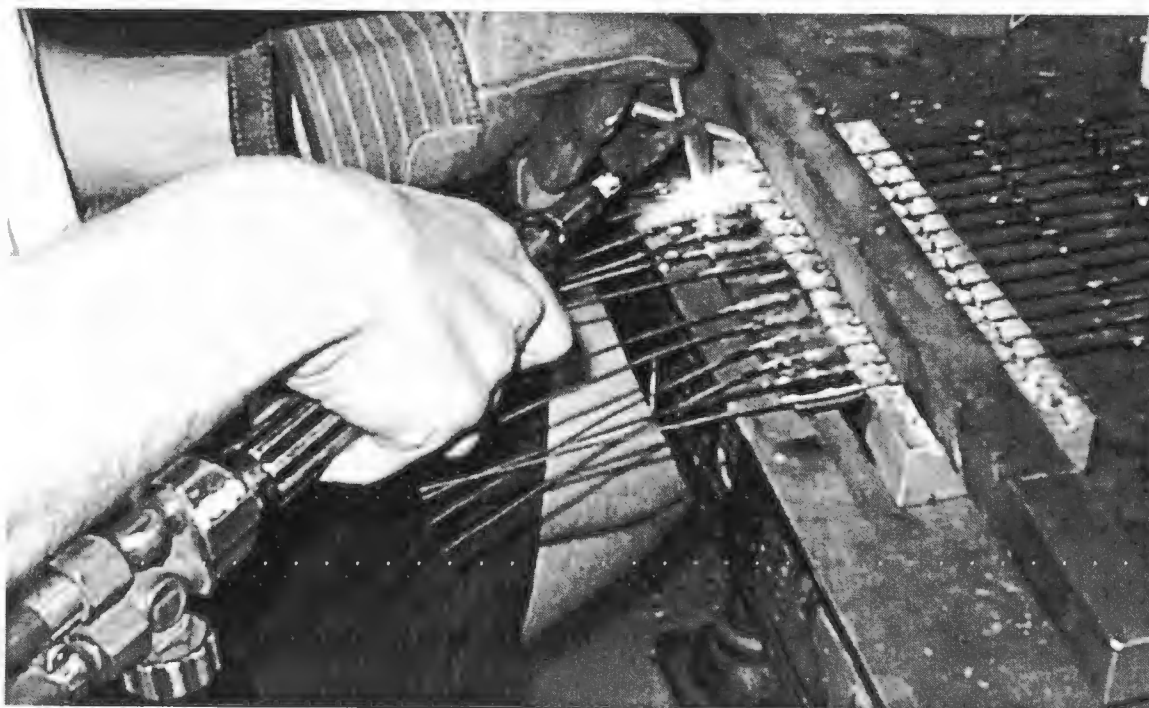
Brazing the ty wires using an oxyacetylene torch and brazing rod.
